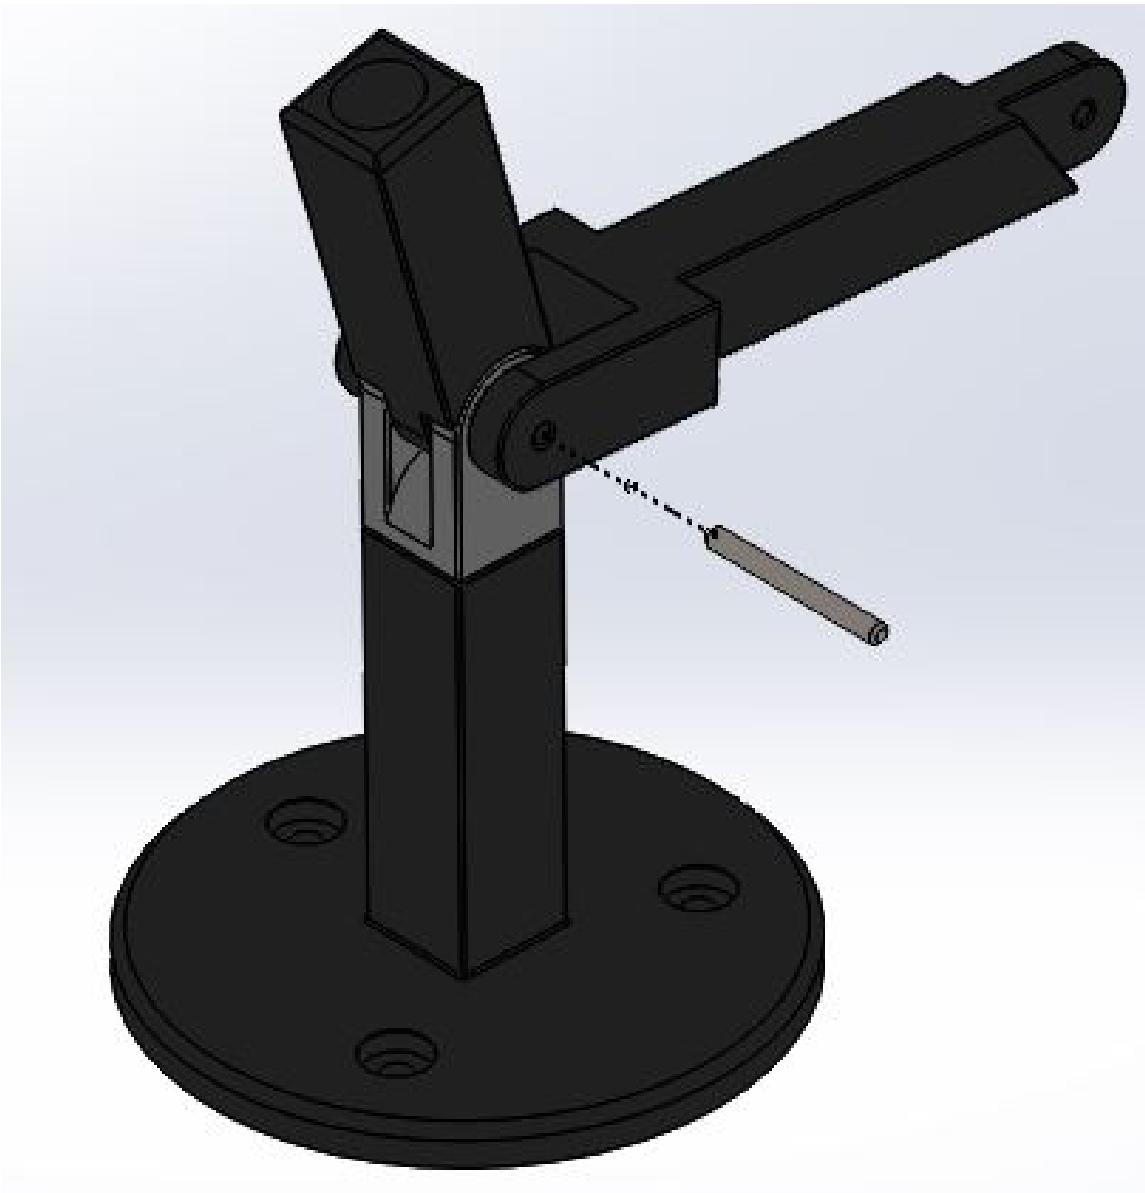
Rodriguez, Juan: Assembly Step 2
